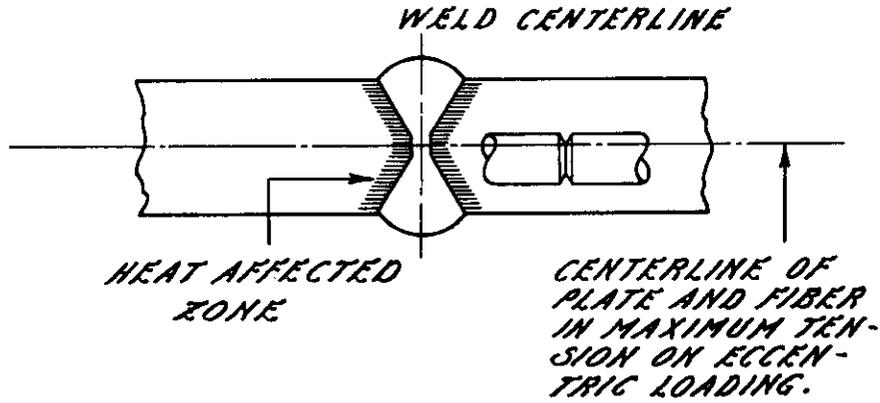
LOCATION OF SPECIMEN IN THICKNESS DIMENSION OF WELDMENT.
